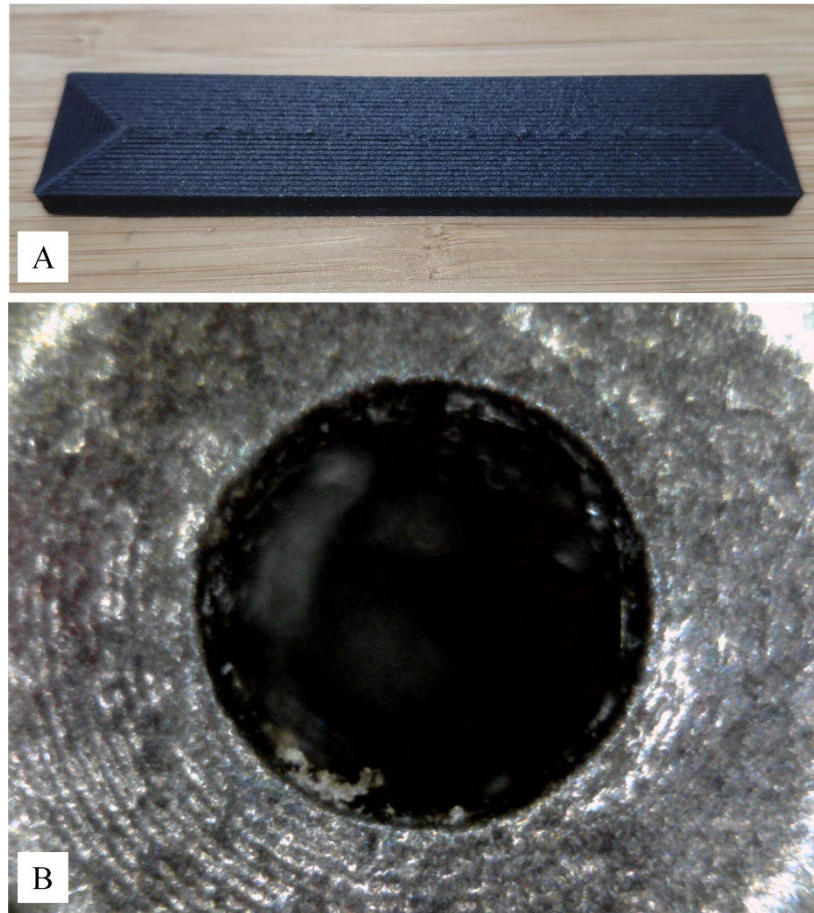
Photography of one of a 3D printed rectangular sample (A). Photography of a nozzle front opening after 3D printing of around 1 kg of abrasive materials (B).
